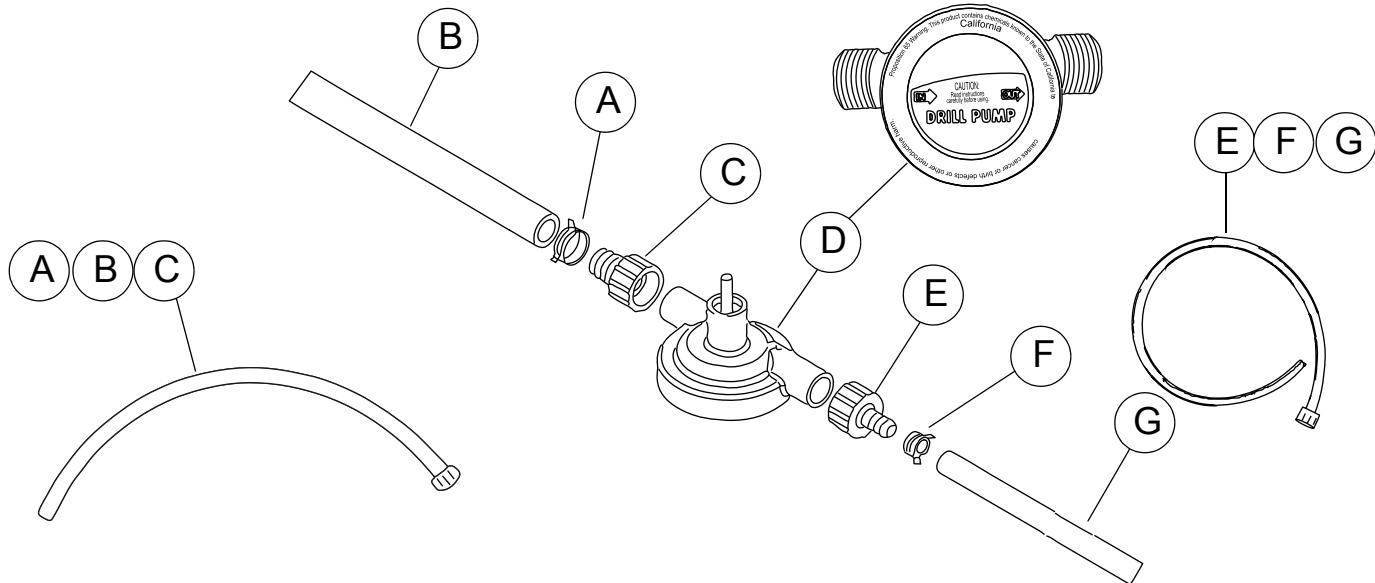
Exploded View – EcoGen Oil System Drain Pump Kit
